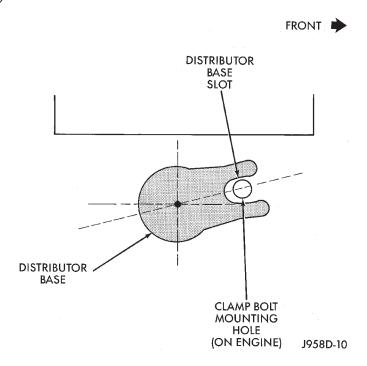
Distributor Engaged Position—4.0L 6-Cylinder Engine
